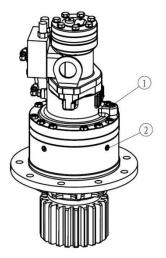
Swing Gearbox 1. Oil filler 2. Viewing port
